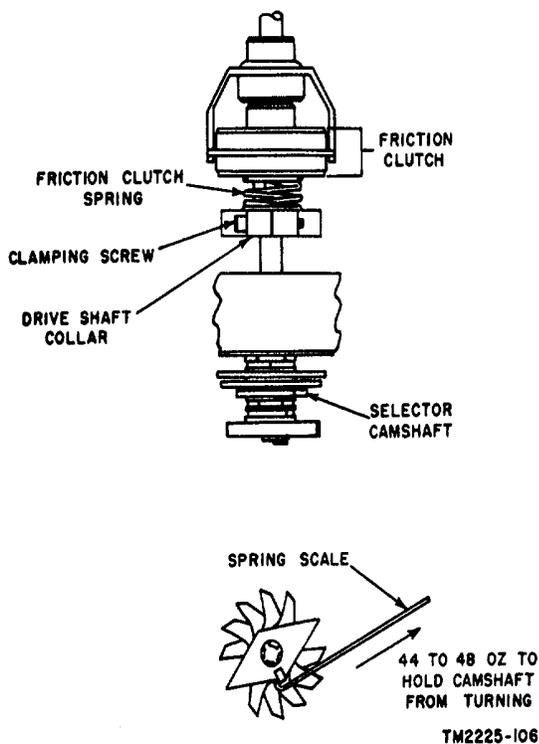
Selector camshaft friction clutch adjustment (TT-76A/GGC and later models).
